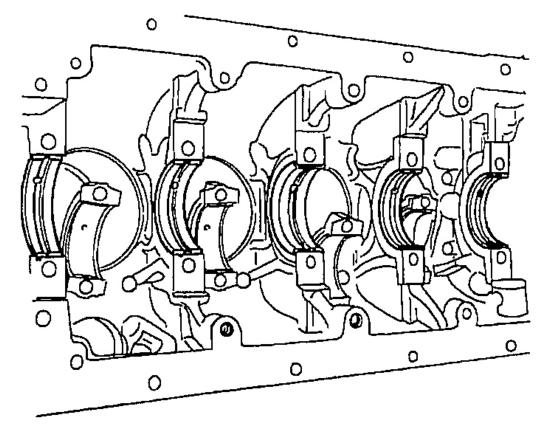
Locating Connecting Rod Bearing Caps Courtesy of SUZUKI OF AMERICA CORP.
